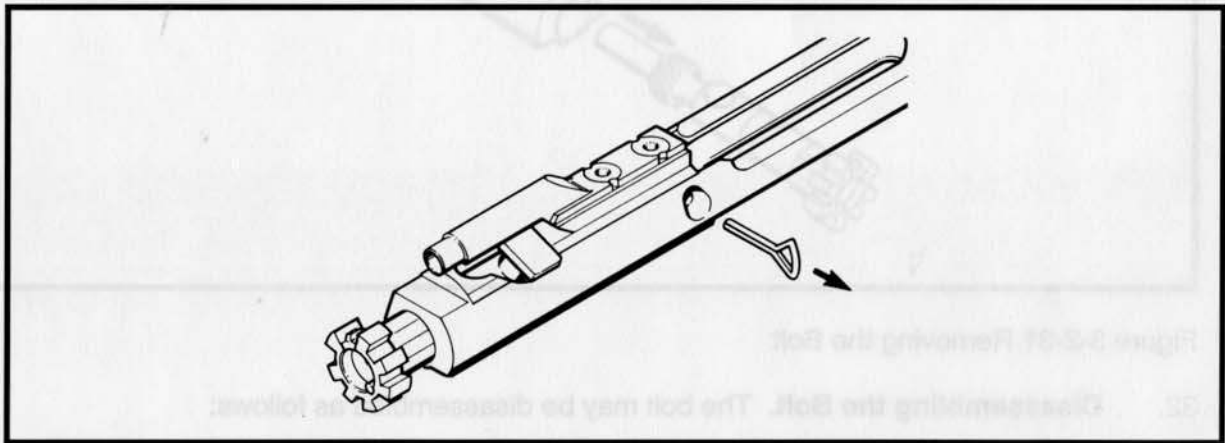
Removing the Firing Pin Retaining Pin
